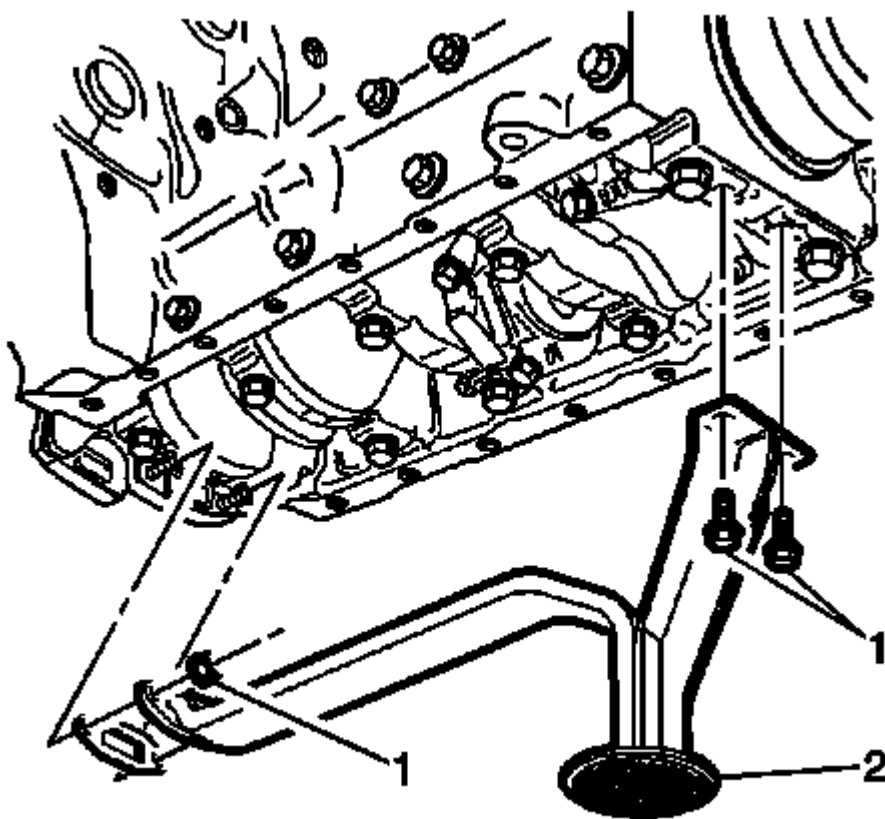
View Of Oil Pump Screen, Bolts, Nuts & Gasket
